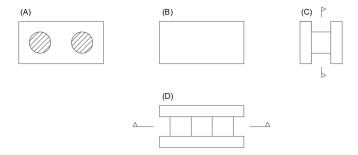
Representation of a block with 2 cylindrical connectors: (A) Sectional view, (B) Main elevation, (C) Side elevation, (D) Top elevation.
